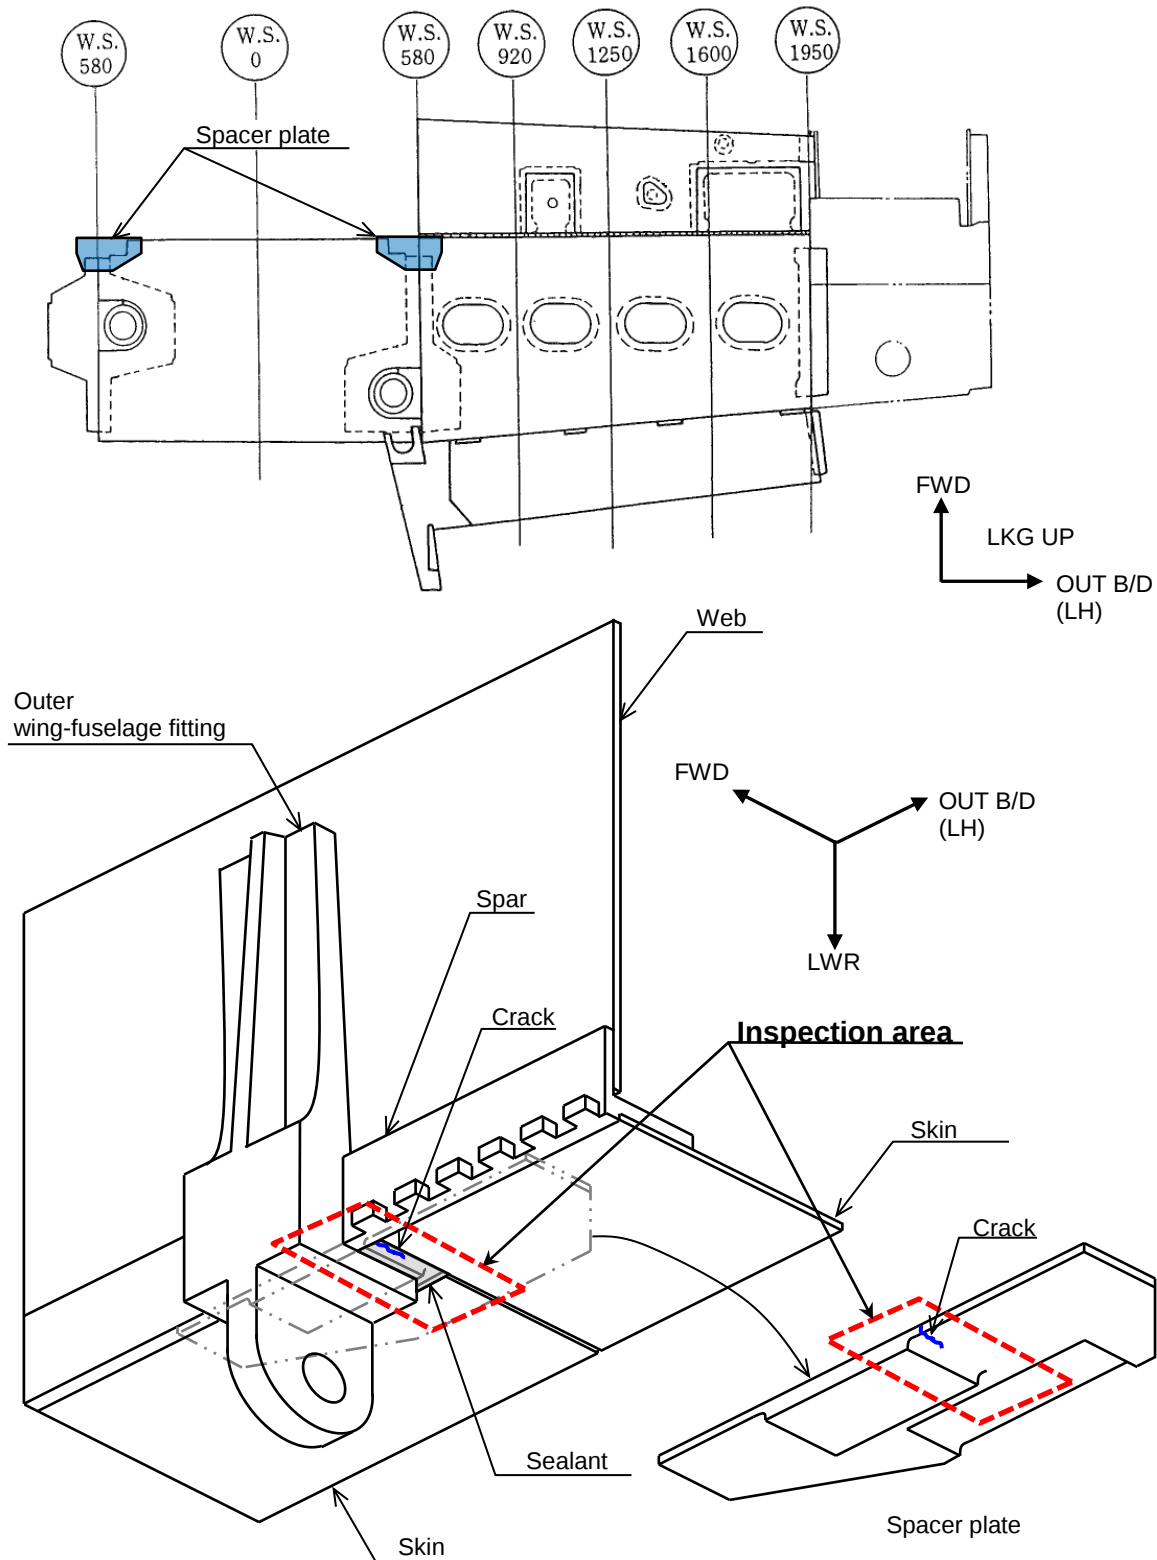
LOCATION OF SPACER PLATE INSPECTION
